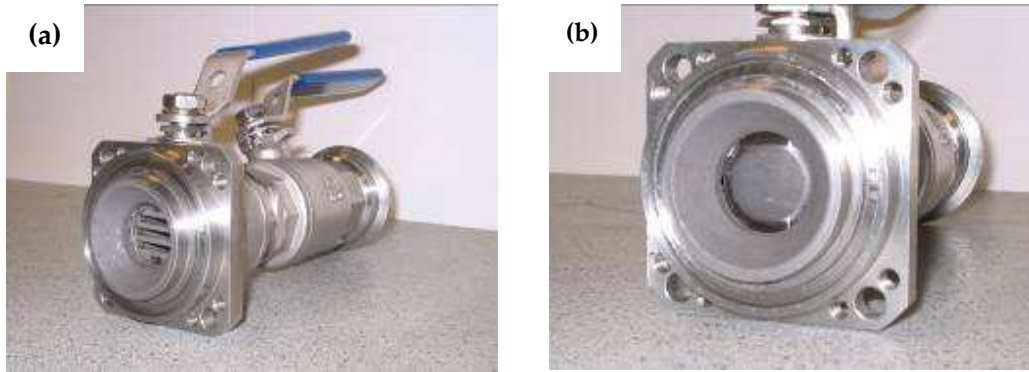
A specially designed draining valve showing (a) the valve open and (b) closed.
